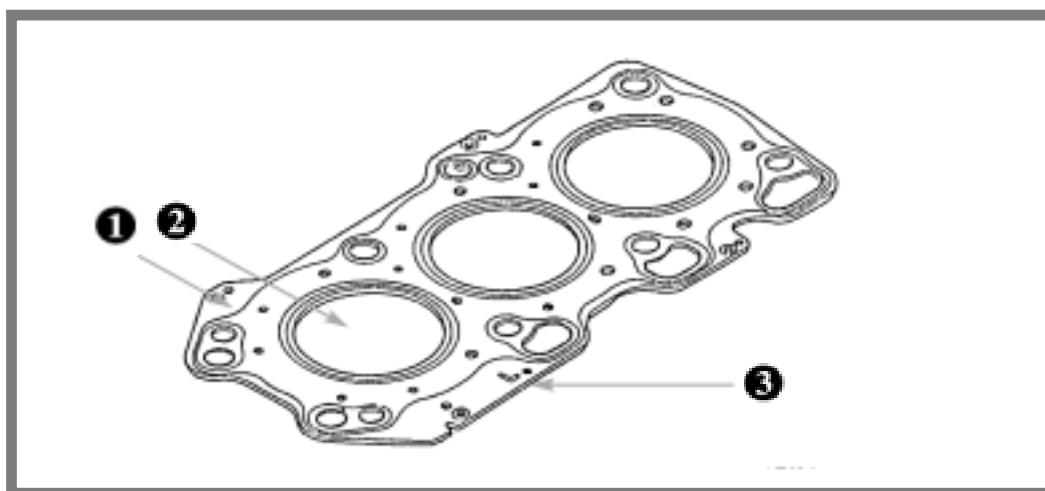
The cylinder head gasket seals the combustion chambers and coolant passages.
